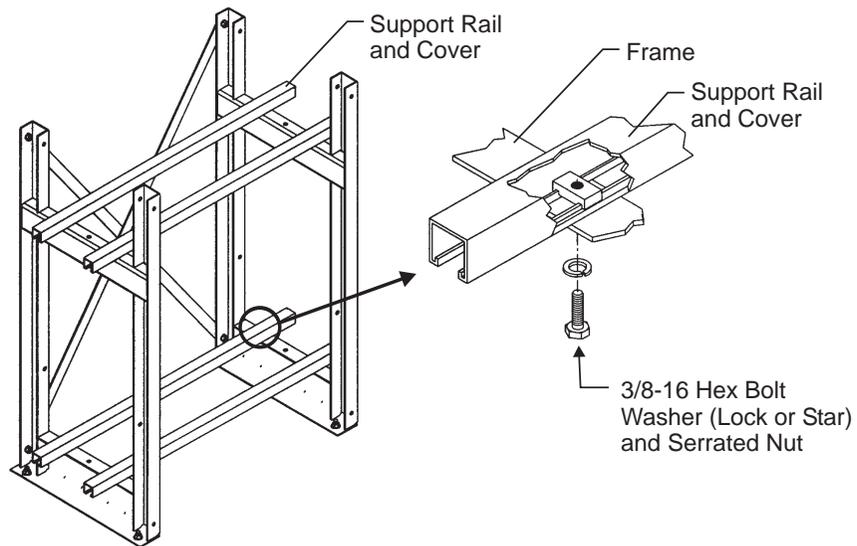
Initial Assembly With Brace to Frame Connection (Reverse View)
